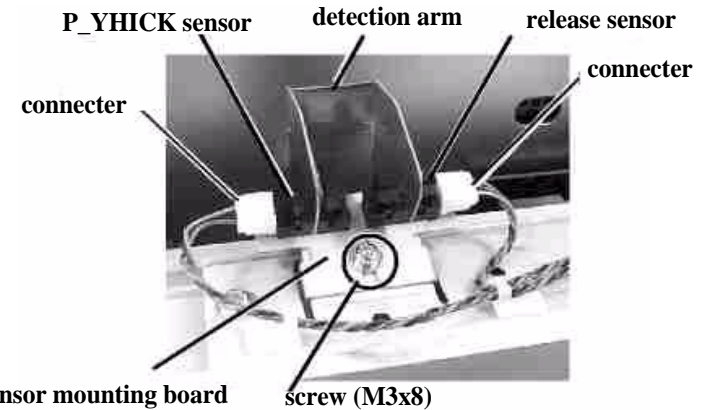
Removing the Release Sensor/P\_THICK Sensor-1
